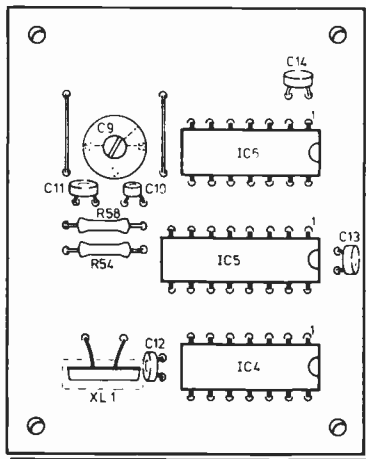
Crystal Timebase board PCB4 component layout. Note that the crystal is fixed to the board by double sided adhesive tape
